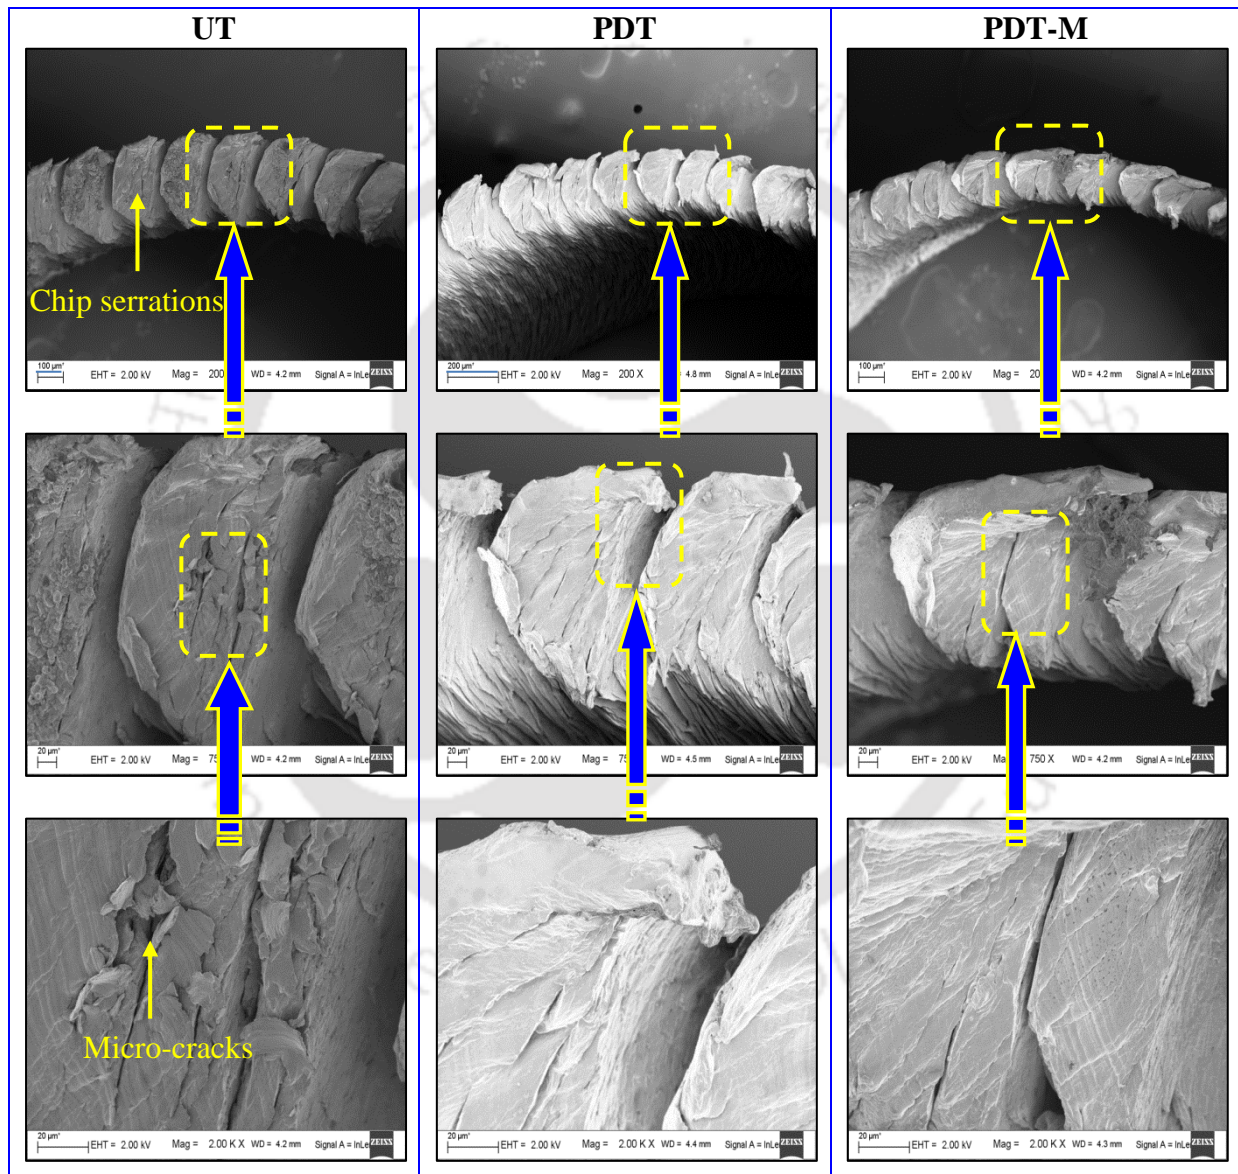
Surface micrograph of machined chips top surface using (a) untextured tool, (b) uncoated perpendicular textured tool and (c) coated perpendicular textured tool (cutting speed of 90 m/min, feed of 0.16 mm/rev and depth of cut of 0.5 mm)
